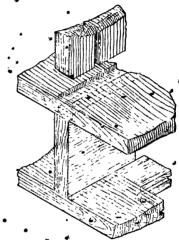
Part of Sideboard Drawer Rails and Partitions.
